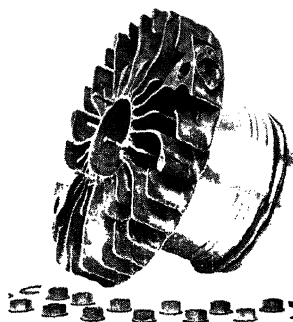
Bristol sleeve valve engine cylinder head, showing junk rings
